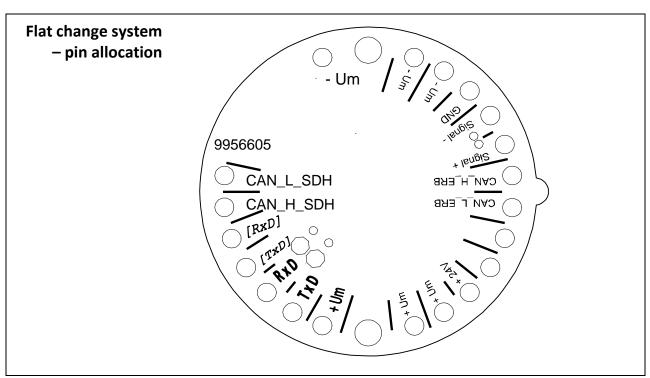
Circuit board at the flat tool change adapter (Upper side)
